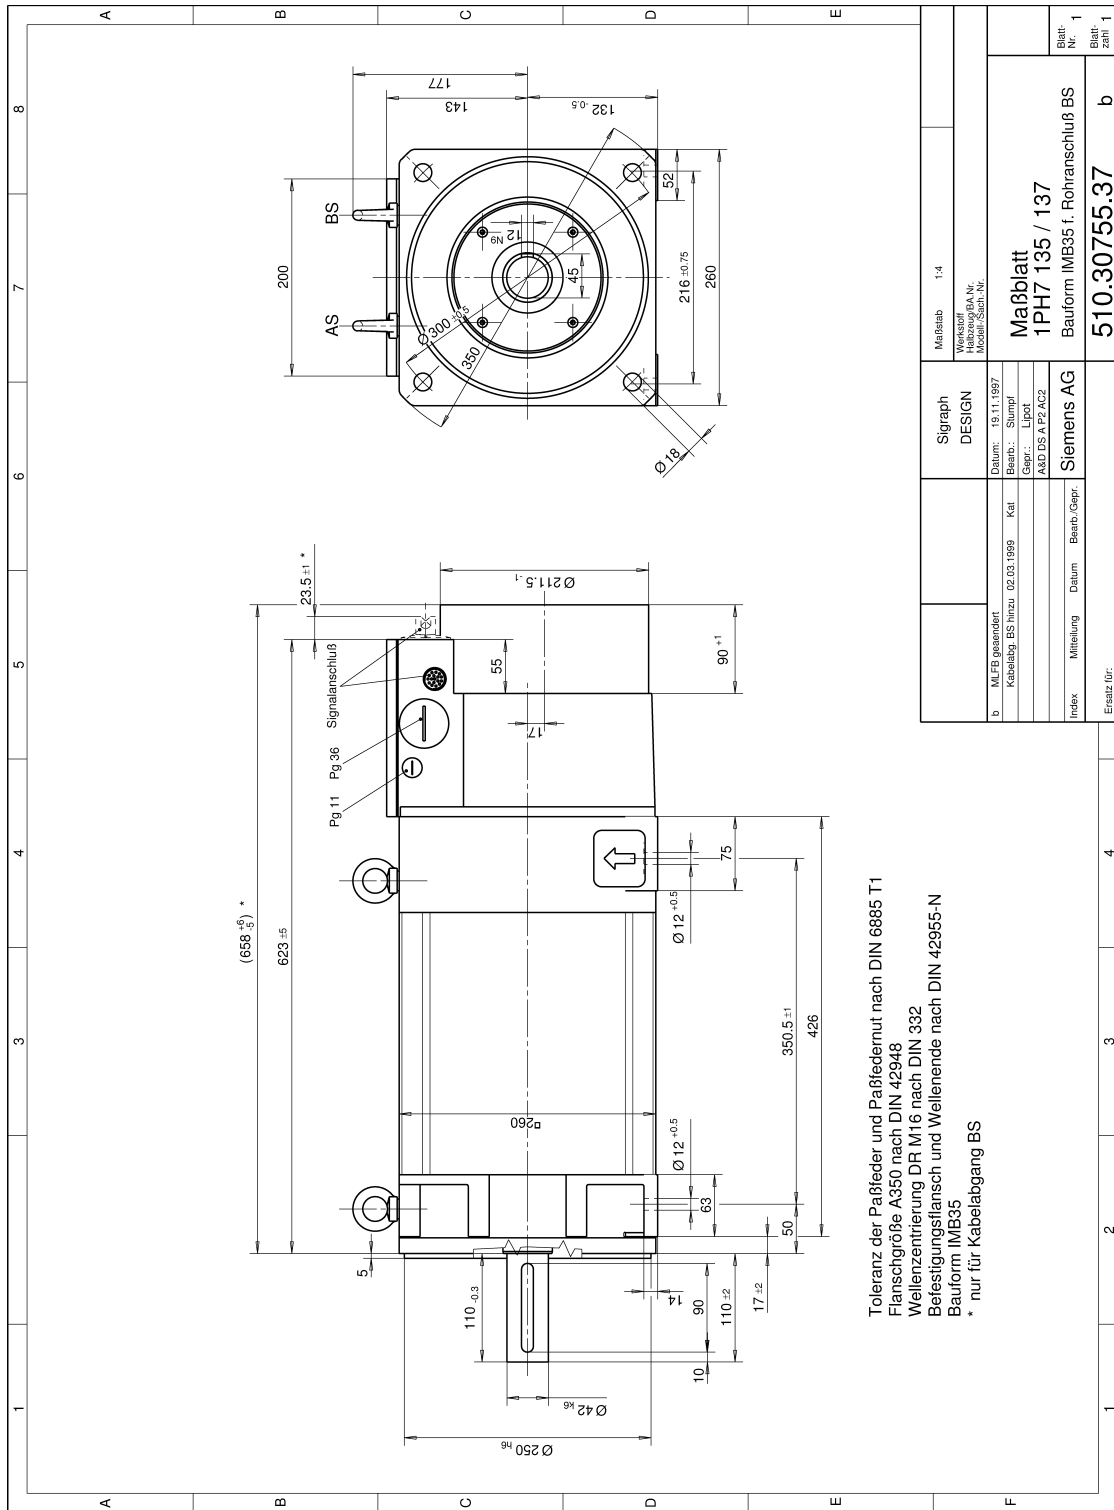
1PH7135 to 1PH7137, IM B35 with pipe connection
